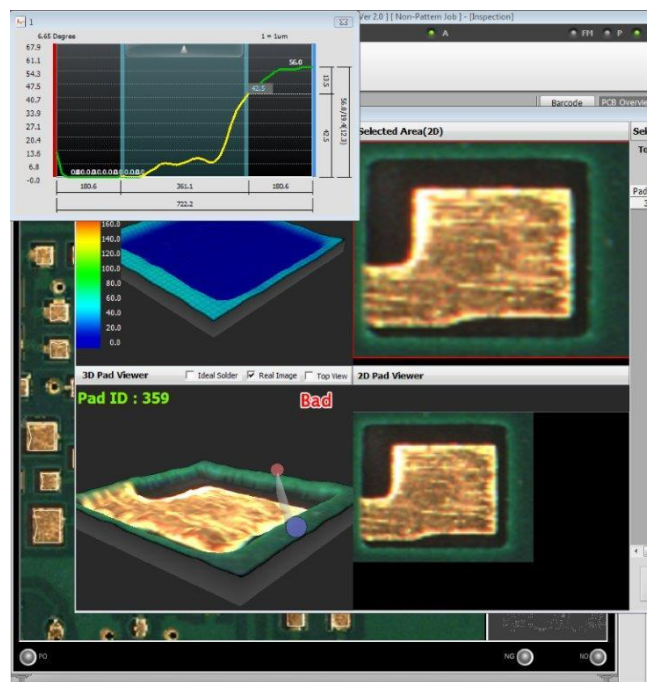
SPI screenshot showing solder mask taller than PCB pad, which prevents proper gasketing of the stencil to the board
